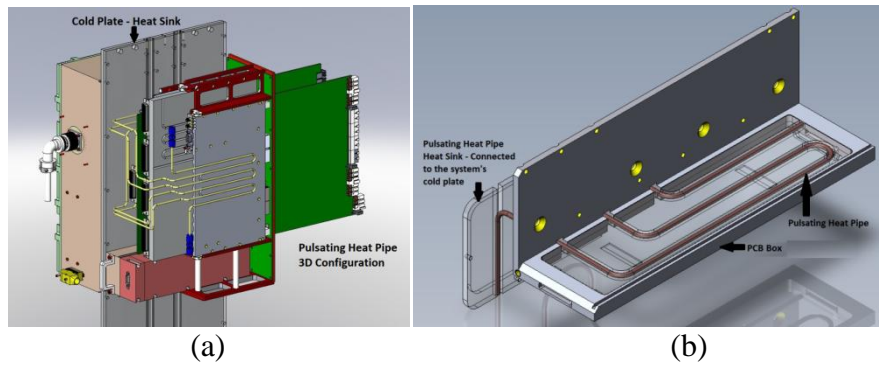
OLPHP schematics: (a) integrated with the PCB's mechanics; (b) setup.
